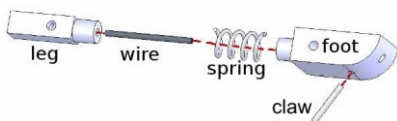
Exploded foot assembly. The foot design allows for passive claw reorientation using a sprung tarsus joint.
